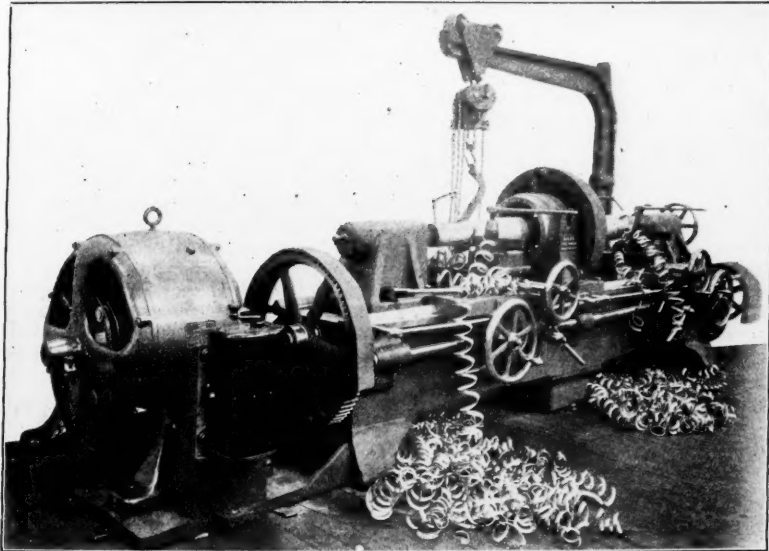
Niles-Bement-Pond No. 3 Double Axle Lathe.
